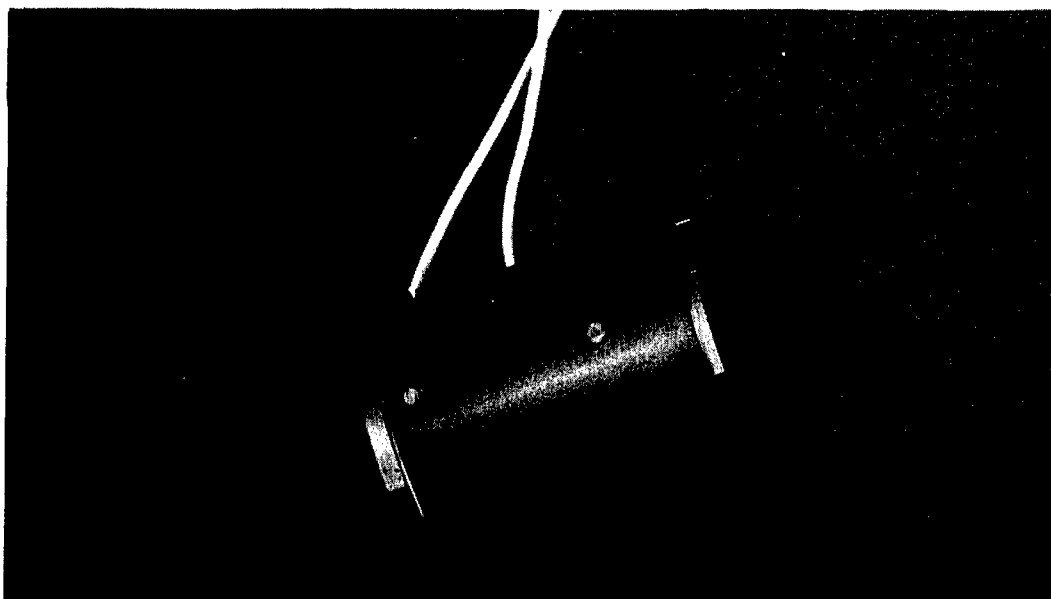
Views Of One Pad For The Second No. 2 Journal Bearing Design Showing Weights Added To Increase Pad Inertia In Roll Direction
